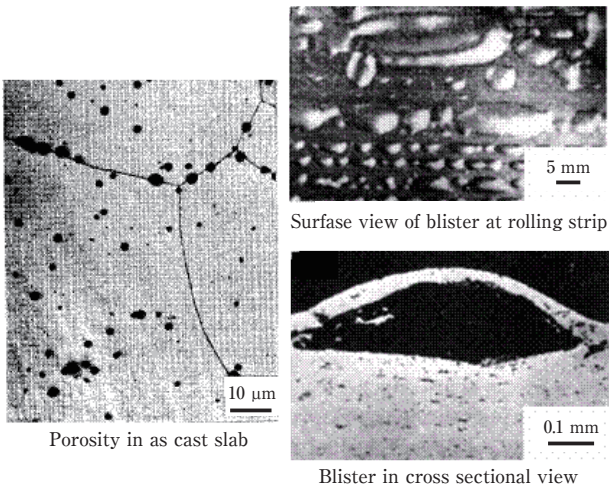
Porosity and blister due to hydrogen gas dissolved in the molten aluminum <sup>6)</sup>.
